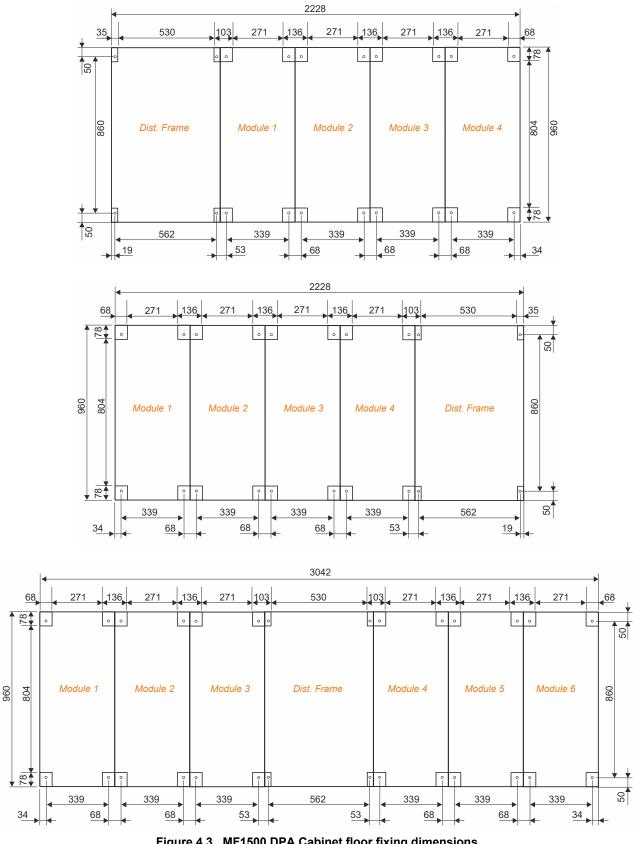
MF1500 DPA Cabinet floor fixing dimensions
